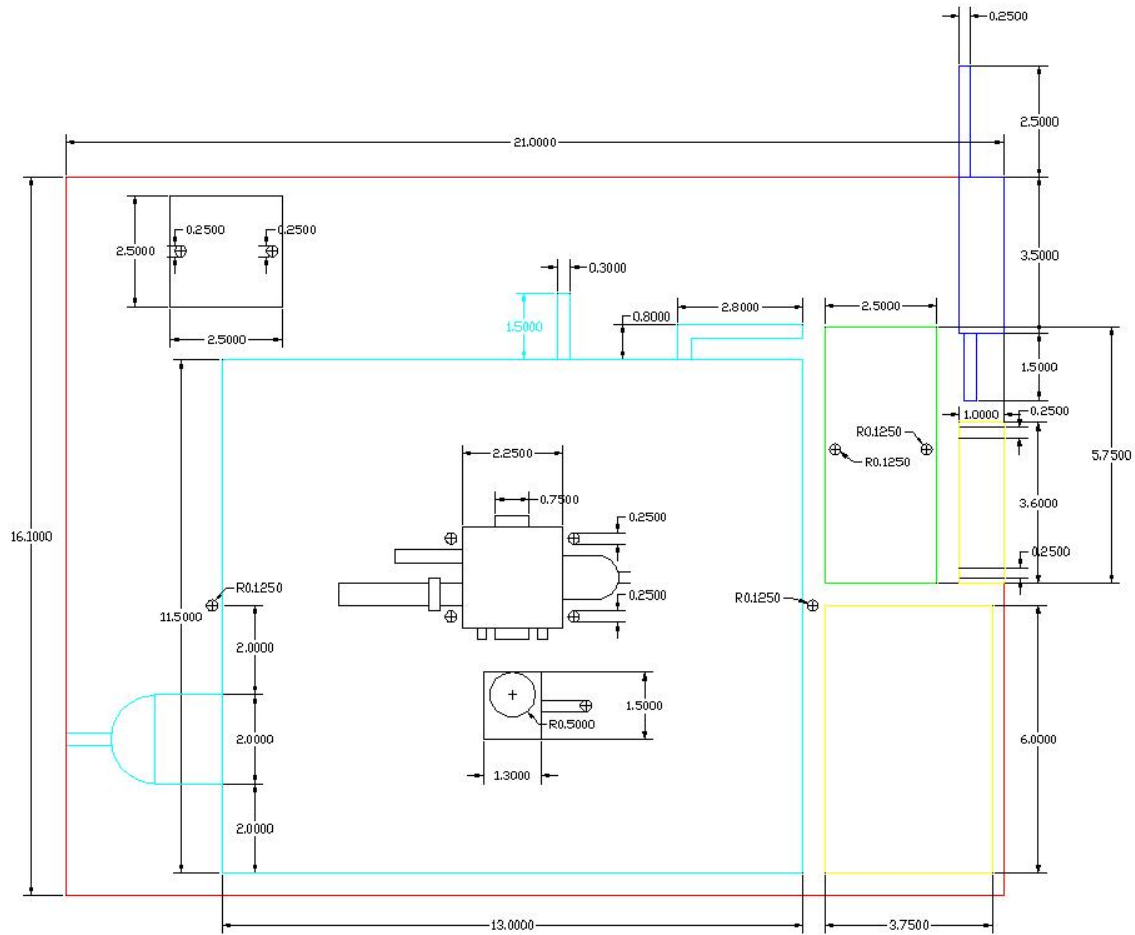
CAD drawing of the internal layout of the infrared imaging sensor brick components.
